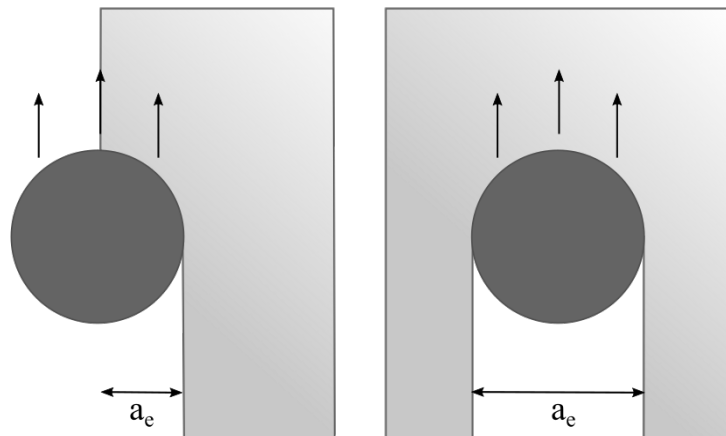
Schematic showing different extents of radial engagement, a_e , for a side milling configuration (left) and a full slot operation (right).
